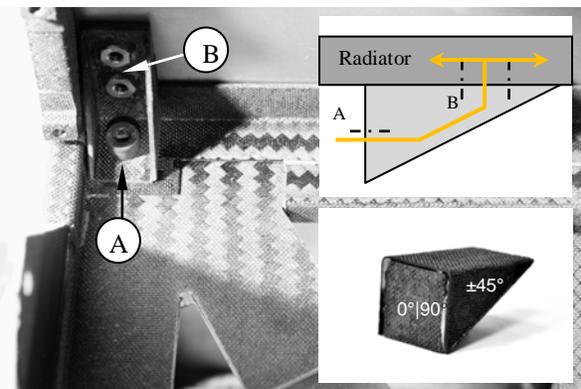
Detail of MASCam support bracket as built in, before drilling and assembly (lower right) and with load path (top right).
